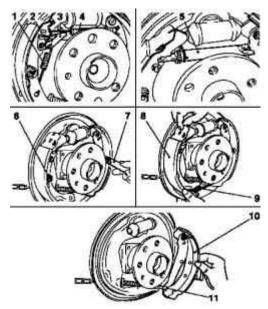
Removing the rear wheel brake pads: 1 - Spring 2 - retaining clamp, 3 - the adjusting lever, 4 - upper spring 5 - adjusting module 6 - cups of compression springs, 7 - a special tool, 8 - front brake pads; 9 - Spring, 10 - Rear brake pads; 11 - the parking brake cable
